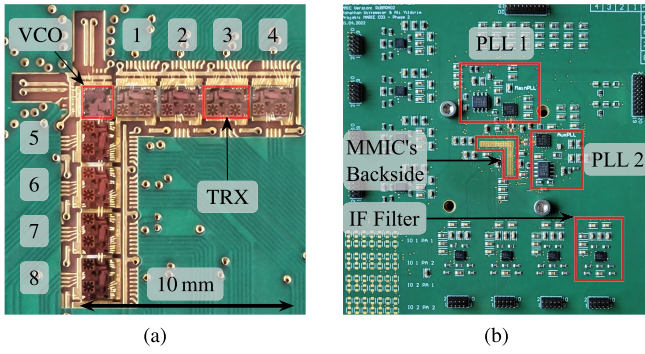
(a) FR4-based front-end PCB of the radar system, including the nine MMICs glued to the PCB and bonded to each other and to the PCB. (b) Backside of the front-end PCB includes two PLL circuits and eight IF amplifier channels.
